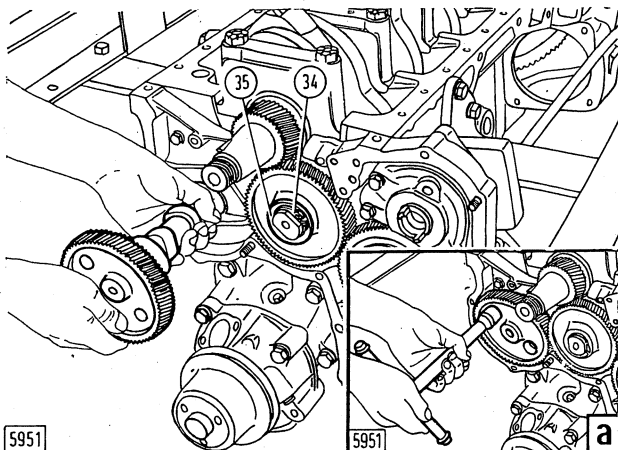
Removing the camshaft after withdrawing the screw securing stop plate to crankcase (a).
